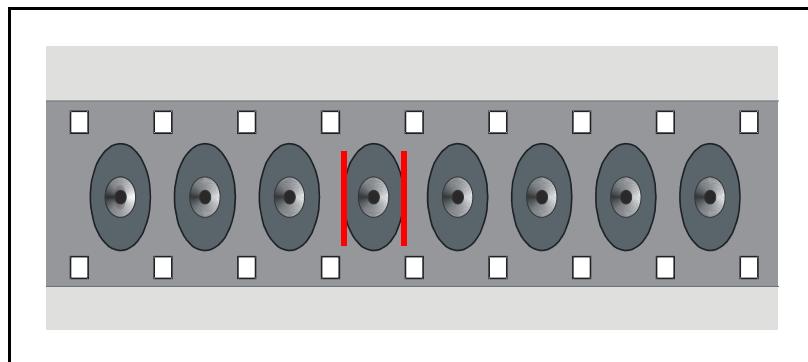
Align the tool using (HC2)HYDRA Camera 2.
